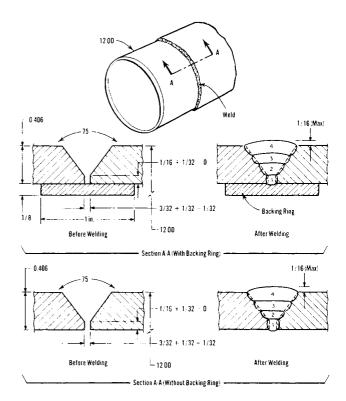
Circumferential welding of .406 in. thick $3\frac{1}{2}$ per cent nickel steel pipe for low temperature service, showing joint designs for welding with and without backing ring.
